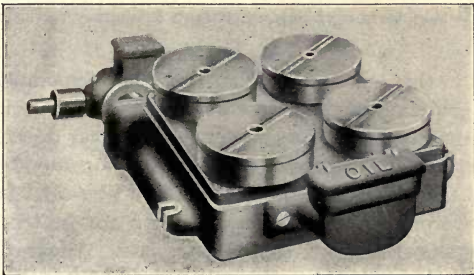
Quadruple rotary chuck for use on Pratt & Whitney vertical surfacer.
